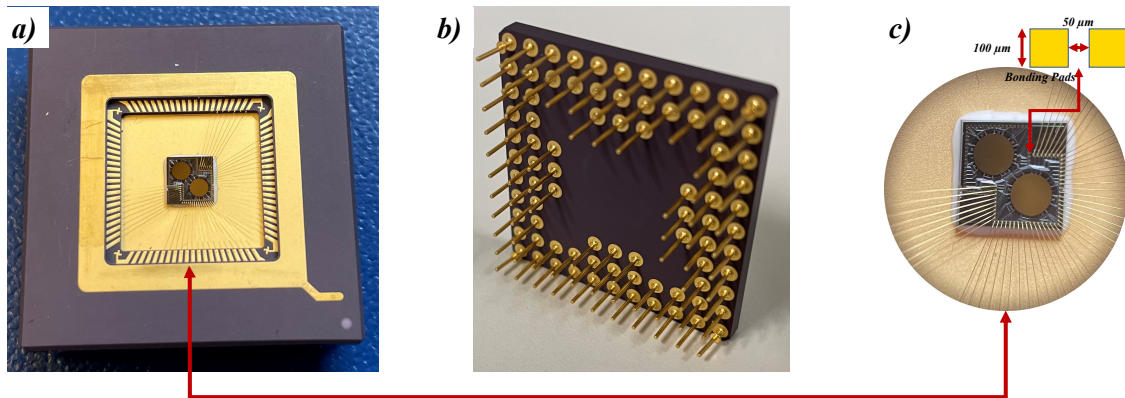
a) Chip carrier, b) Backside of the chip carrier, c) Wirebonded chip
